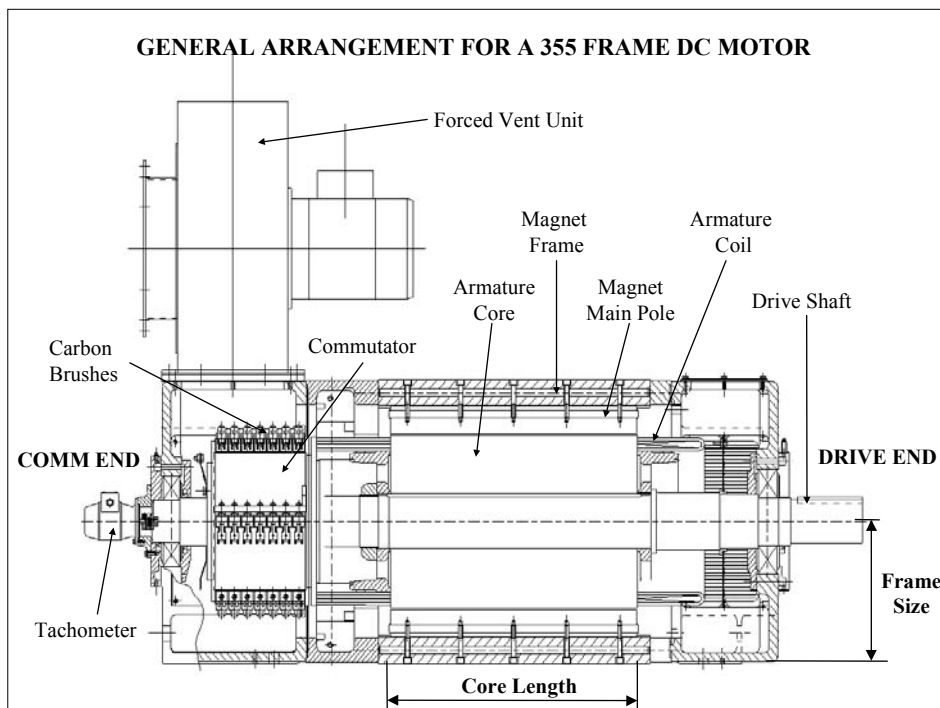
Cross-sectional drawing of a large DC motor showing major components
